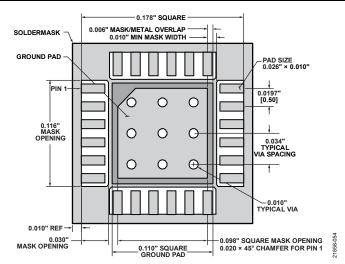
131656-HMC977LP4E PCB Land Pattern Footprint
